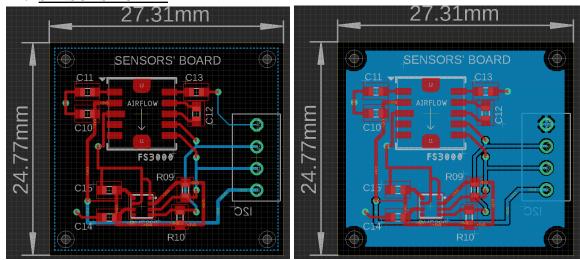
PCB Layout of Sensors' Board (a. w/o GND place; b. w/ GND plane)
